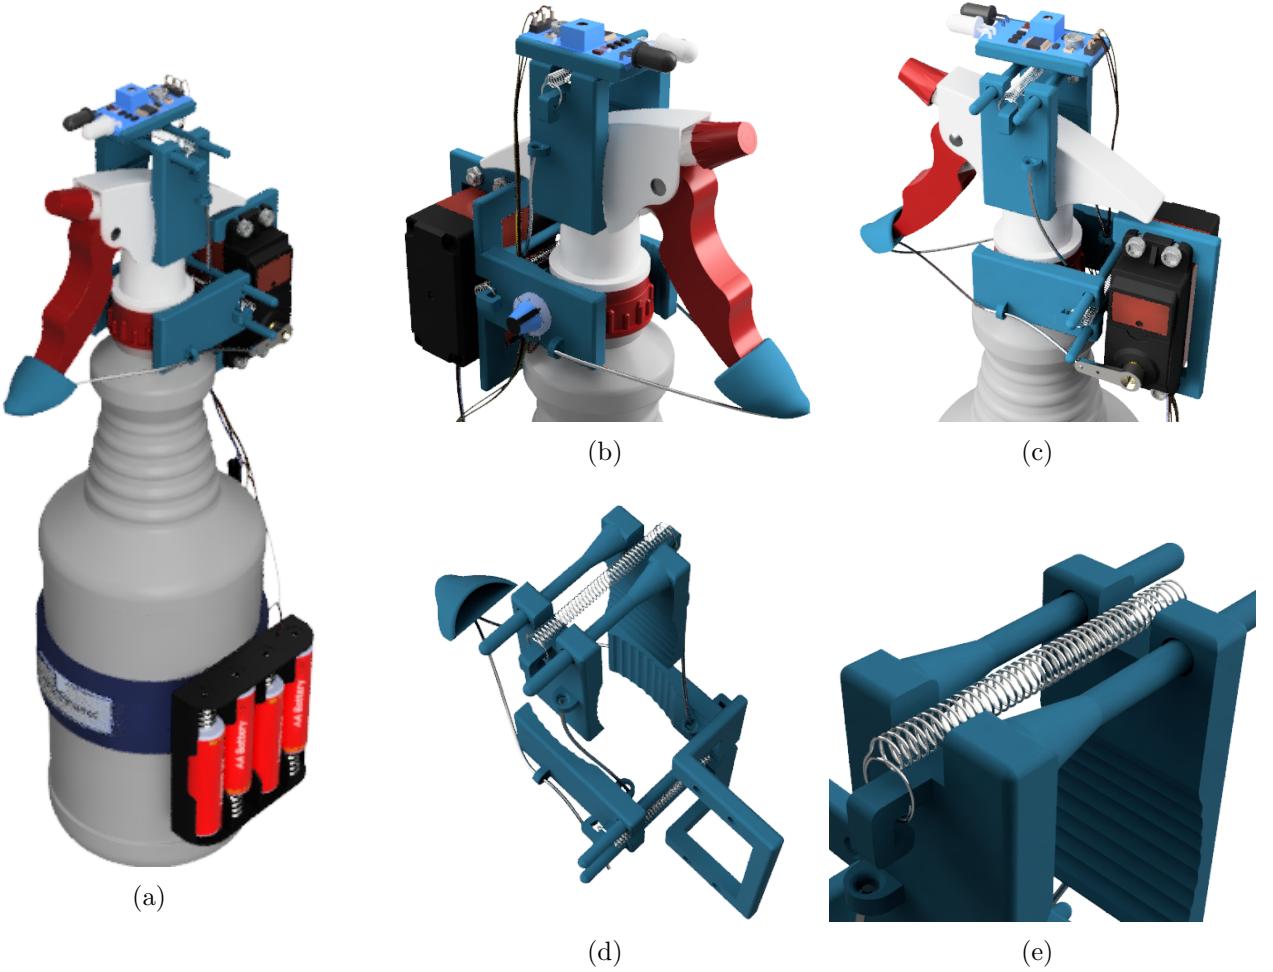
Spray Bottle CAD Model. (a) CAD model of entire spraying device mounted on example spray bottle. (b) Side view of potentiometer. (c) Side view of servo-cable mechanism. (d) Bare assembly. (e) Clamp mechanism.
